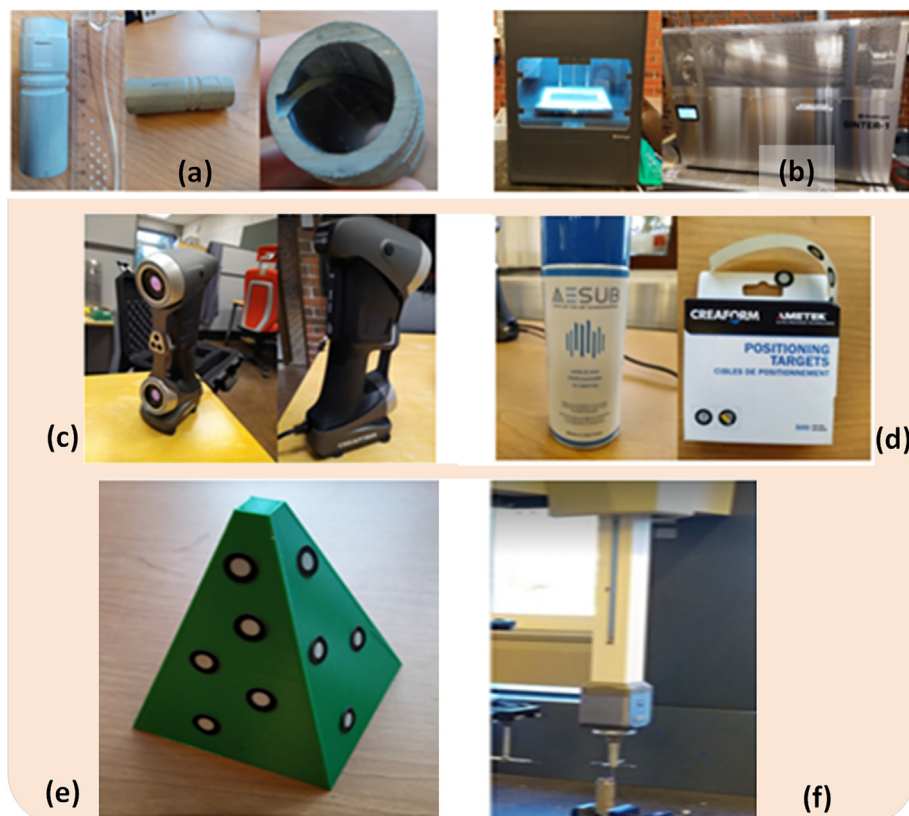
Equipment used in the experiment (a) Test objects for RE, (b) Metal X 3D printer with sintering facility, (c) Handheld 3D scanner, (d) Coating spray and positioning target, (e) Plastic support pyramid and (f) CMM probe.
